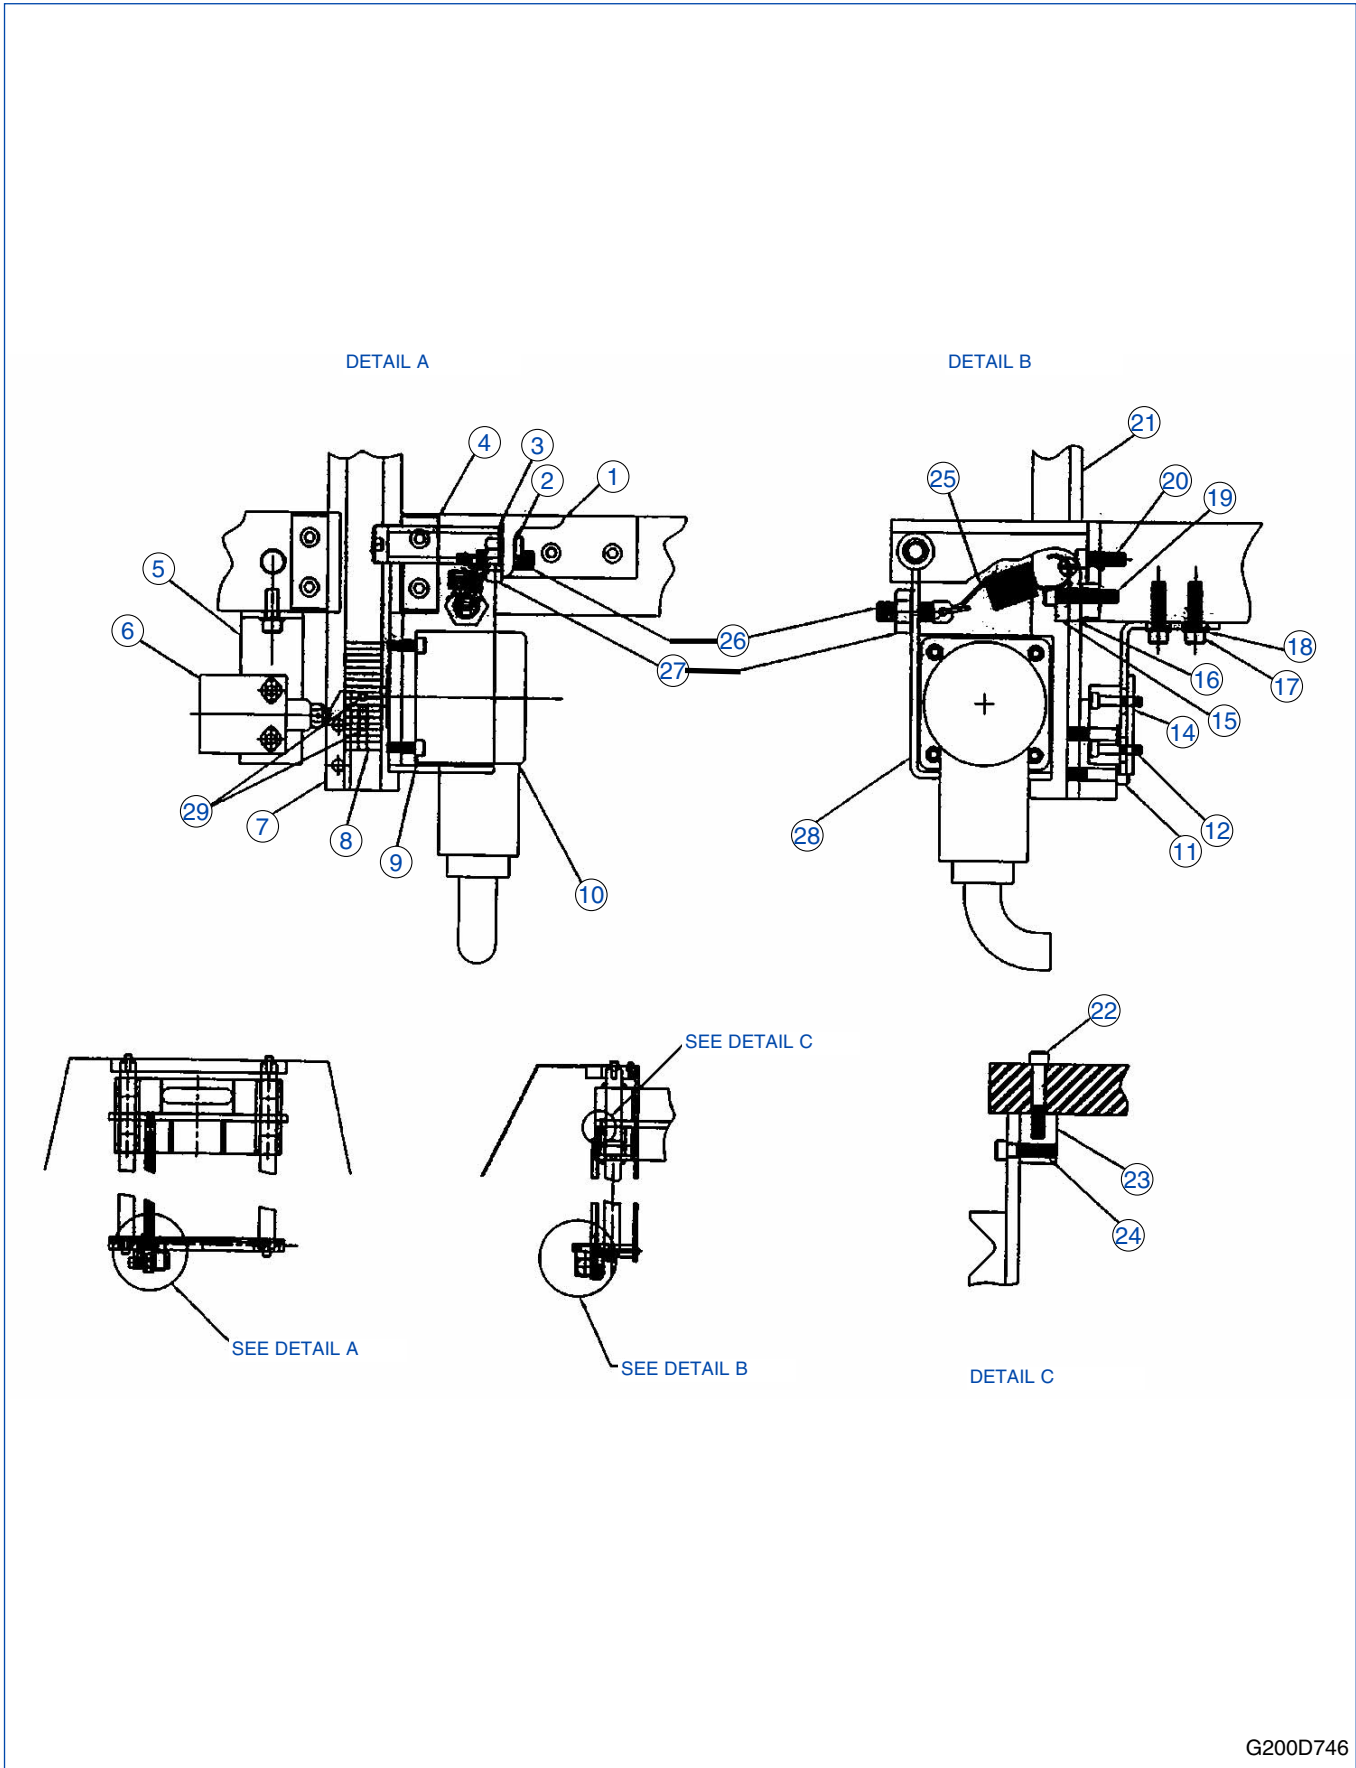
K – CONTROL CONSOLE ASSEMBLY
